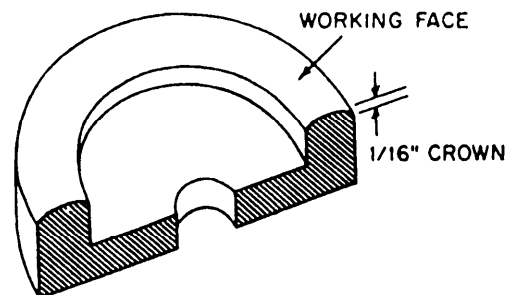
Crown on the working face of a wheel for a carbide tool bit grinder.
